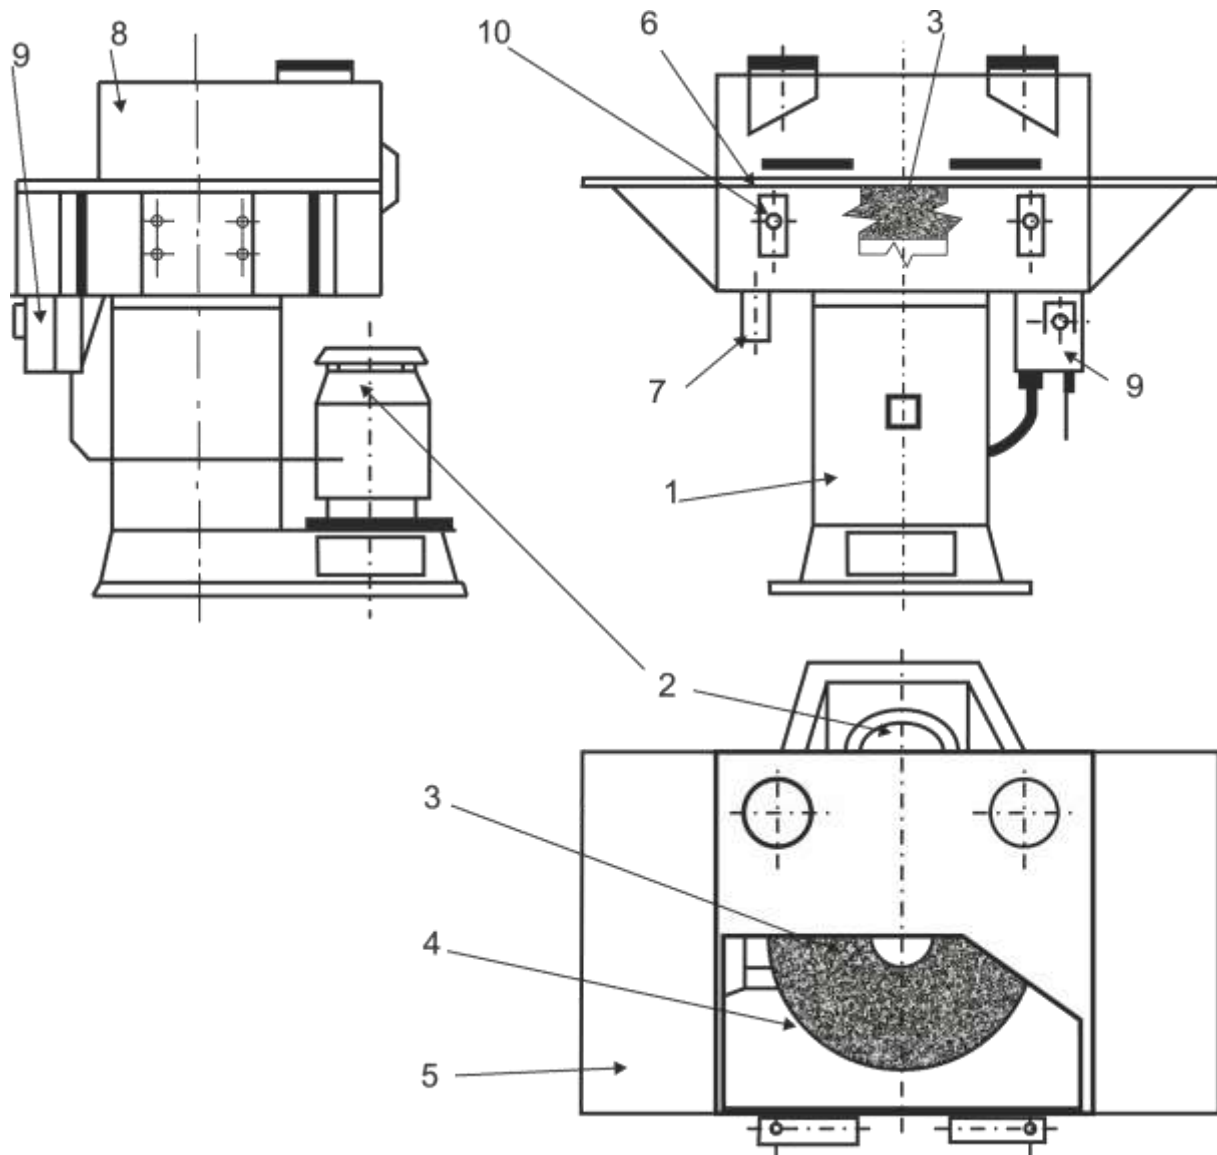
Horizontal grinding machine HS 600: 1 - frame, 2 - electric motor, 3 - grinding wheel, 4 - safety cover, 5 - storage platform, 6 - tank, 7 - waste, 8 - suction cover, 9 - switch with circuit breaker, 10 - mounting
